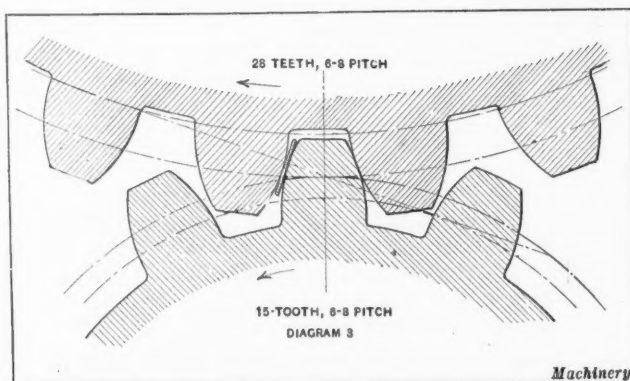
Gears which have been cut Deeper than Standard to give Backlash
